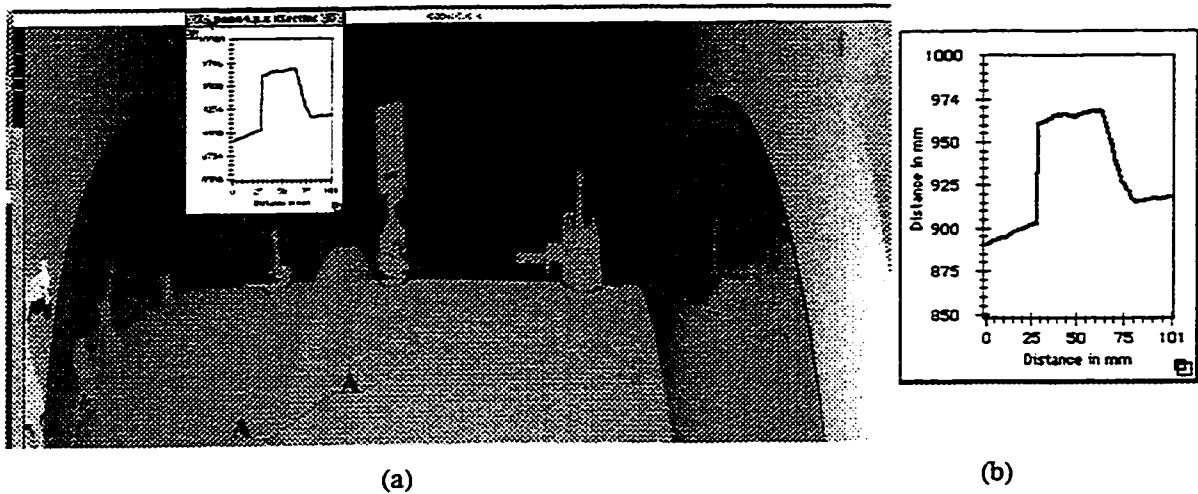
(a) Depth coded image of the machinery coupling and the 2-D translation stage. (b) The flange's approximate dimensions in millimetres.
